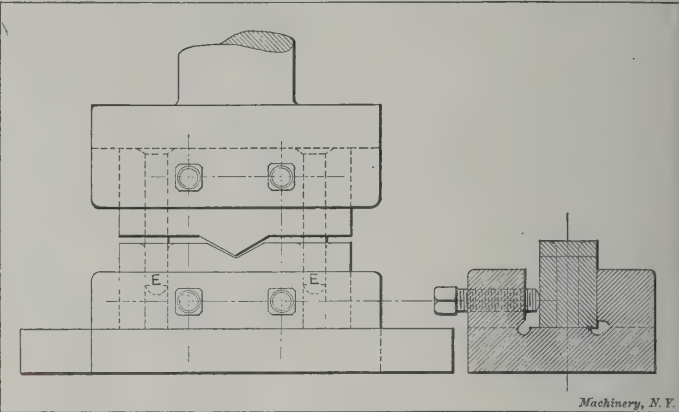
Simple Form of Die Holder adapted to Bending Die
